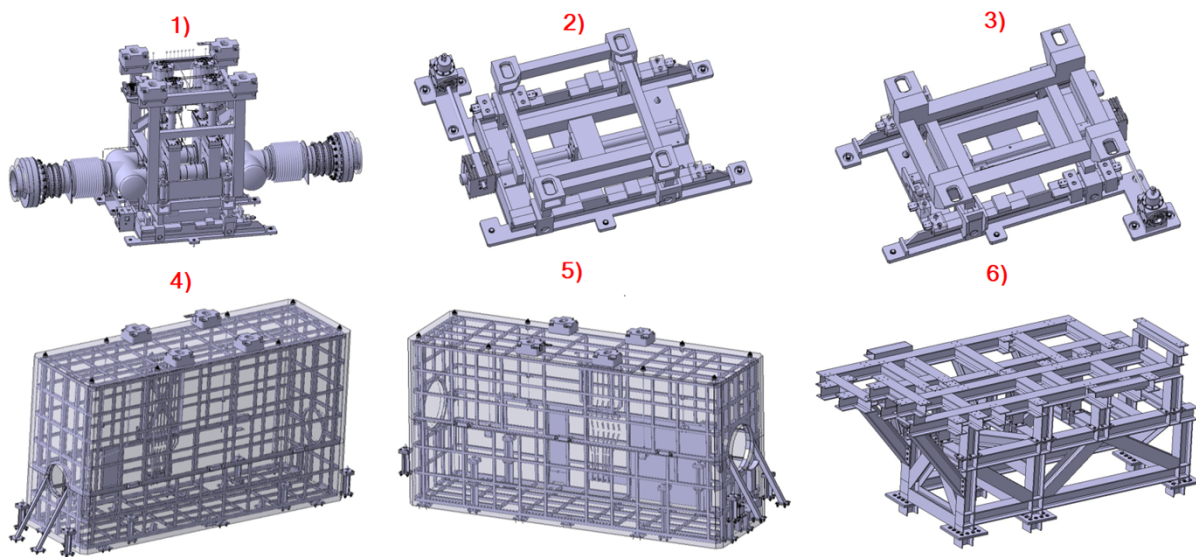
D model of each component in the scope of supply including Bleed Valves for clarity
